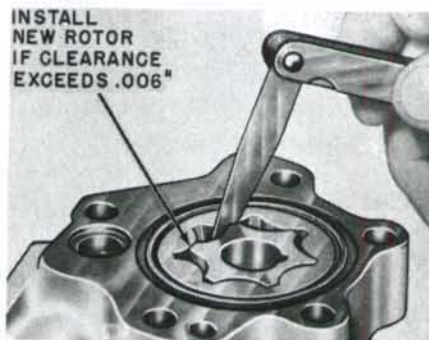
Measuring drive rotor to driven rotor tooth clearance. Renew rotor set if clearance exceeds 0.006.
